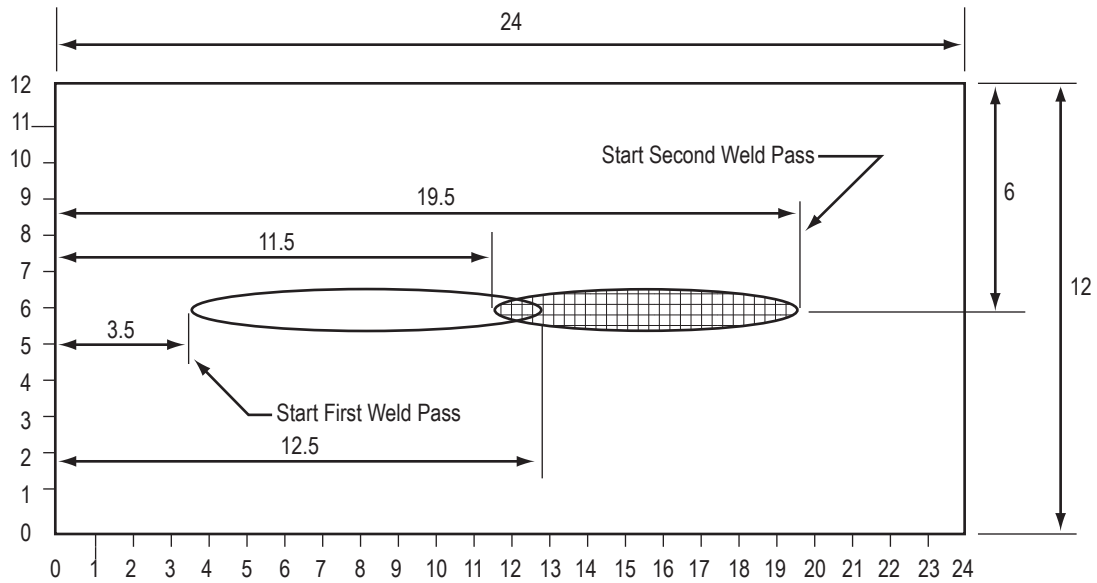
MSFC demonstration panel weld locations/passes.
